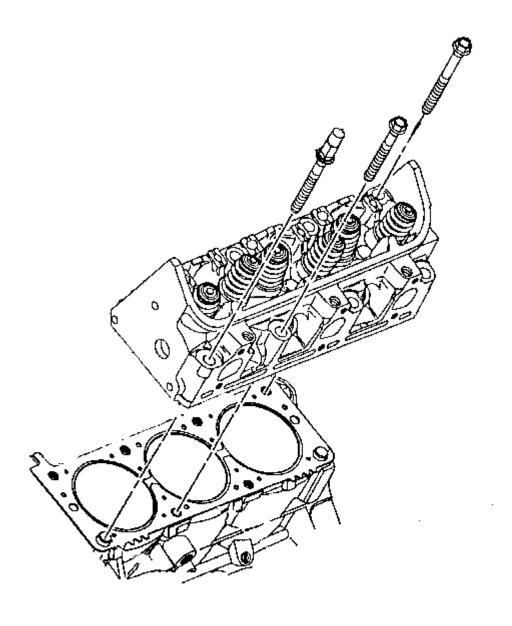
View Of Cylinder Head Courtesy of GENERAL MOTORS CORP.
